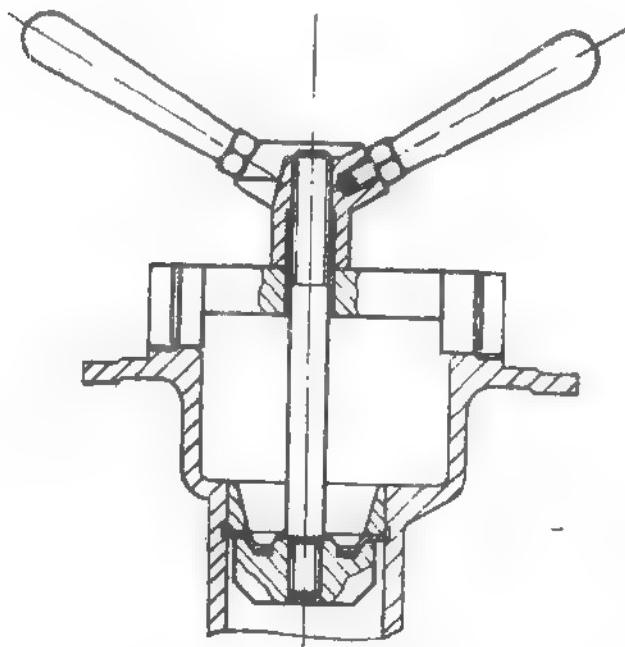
129. EXTRACTING REAR DIFFERENTIAL INNER BEARING OUTER RACE, USING D 143.
